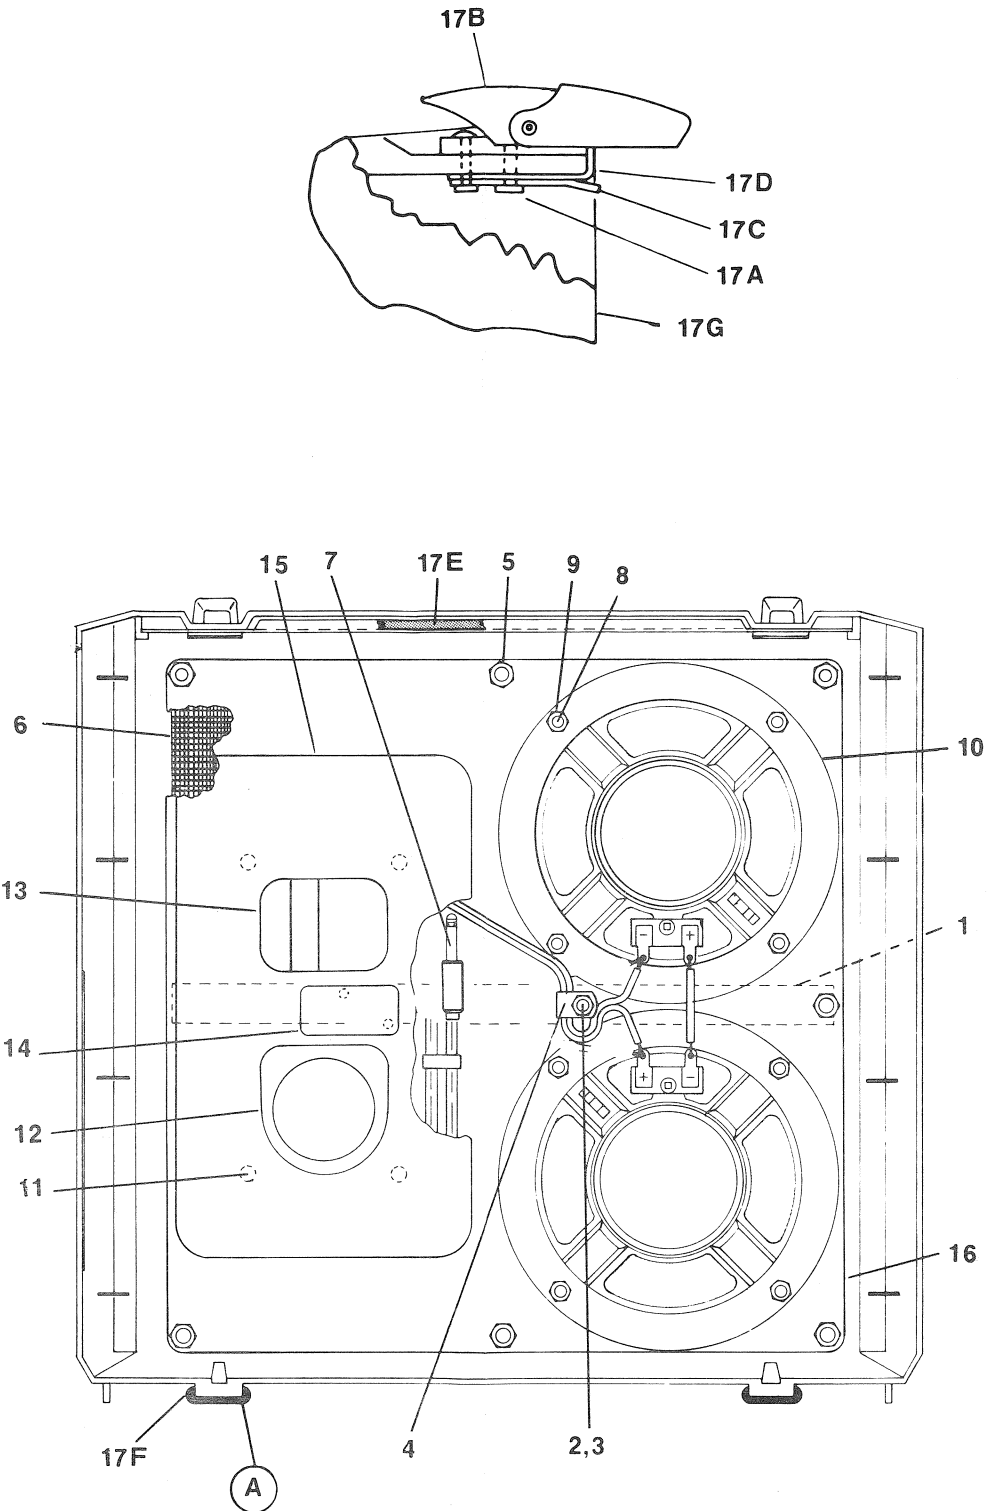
FRONT COVER AND SPEAKER ASSEMBLY
